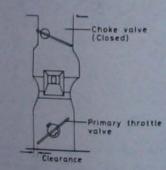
Fast idle clearance checking point - Hitachi carburettor (Sec 12)
